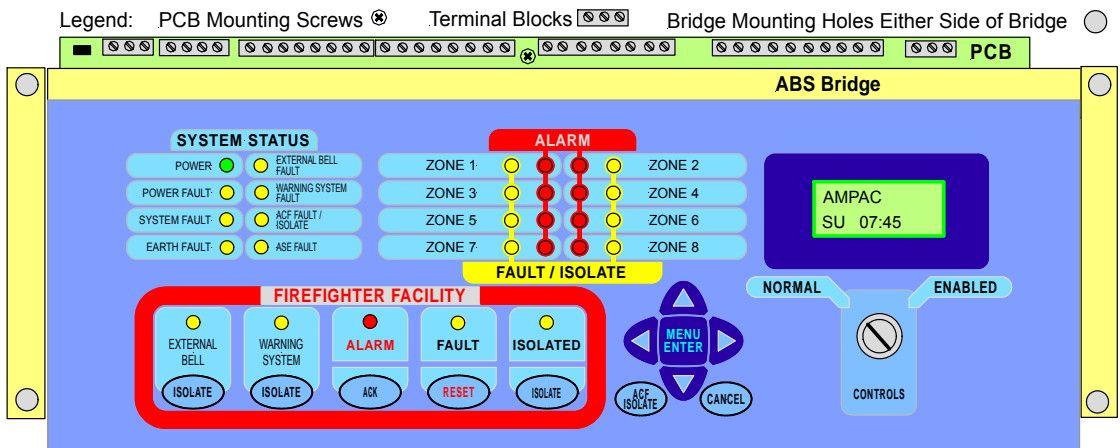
Exploded Front View of Membrane, Bridge and PCB for the ABS Model
